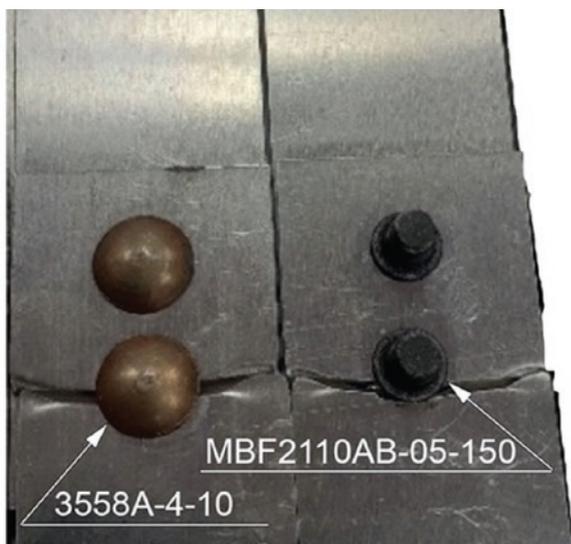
View of lap joint damage for two types of fasteners (3558A-4-10 and MBF2110AB-05-150)
